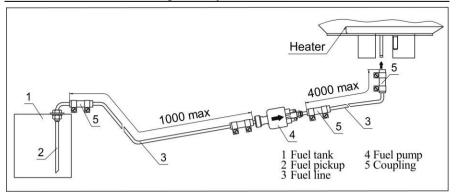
Example of fuel supply to the heater with a fuel suction hose
